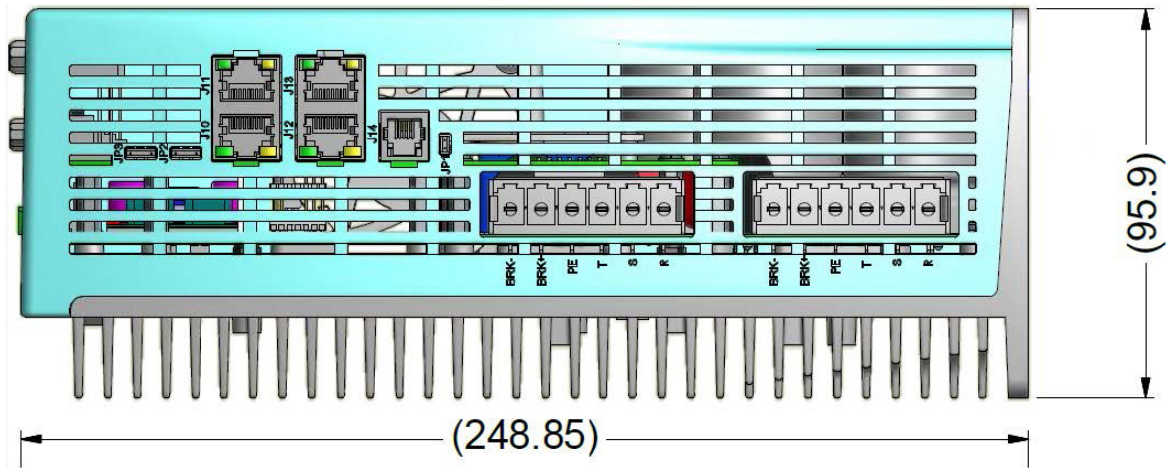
Dimensions - Side (Communications, Motor Connectors) View
